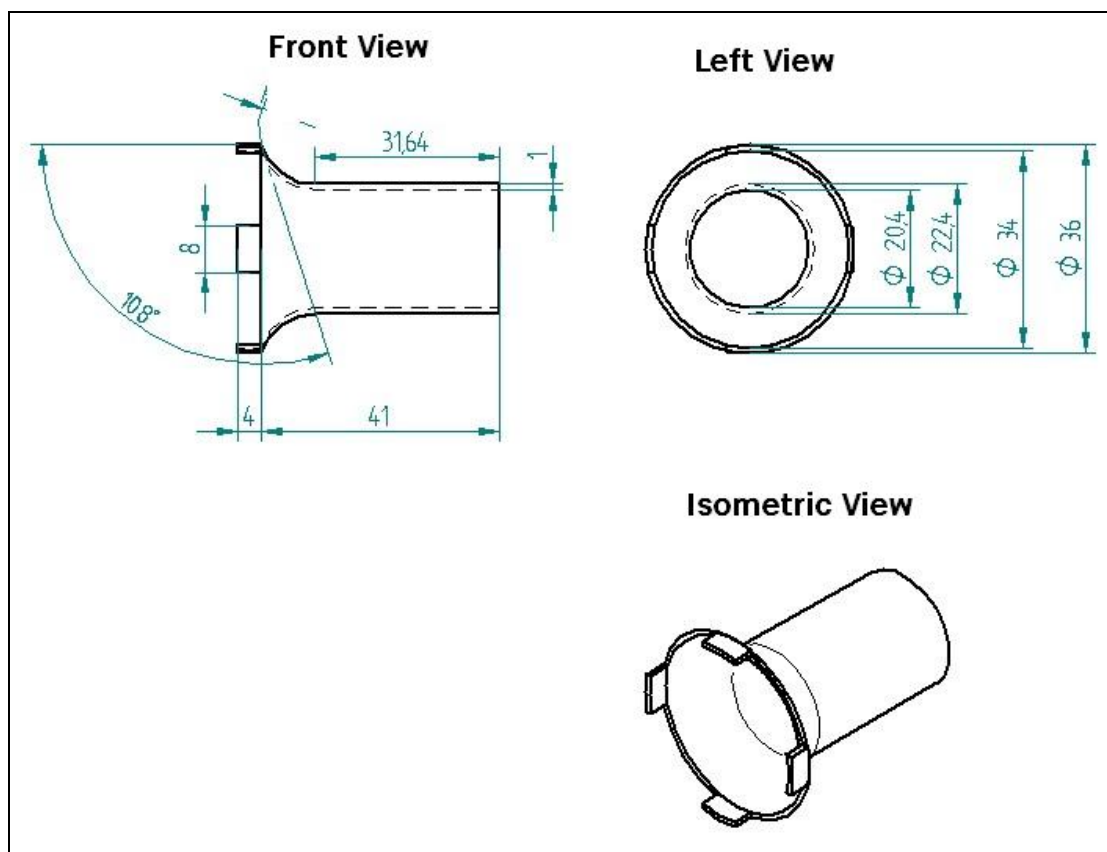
A Schematic of the Second Torch Bonnet Design (Dimensions Measured in mm).
